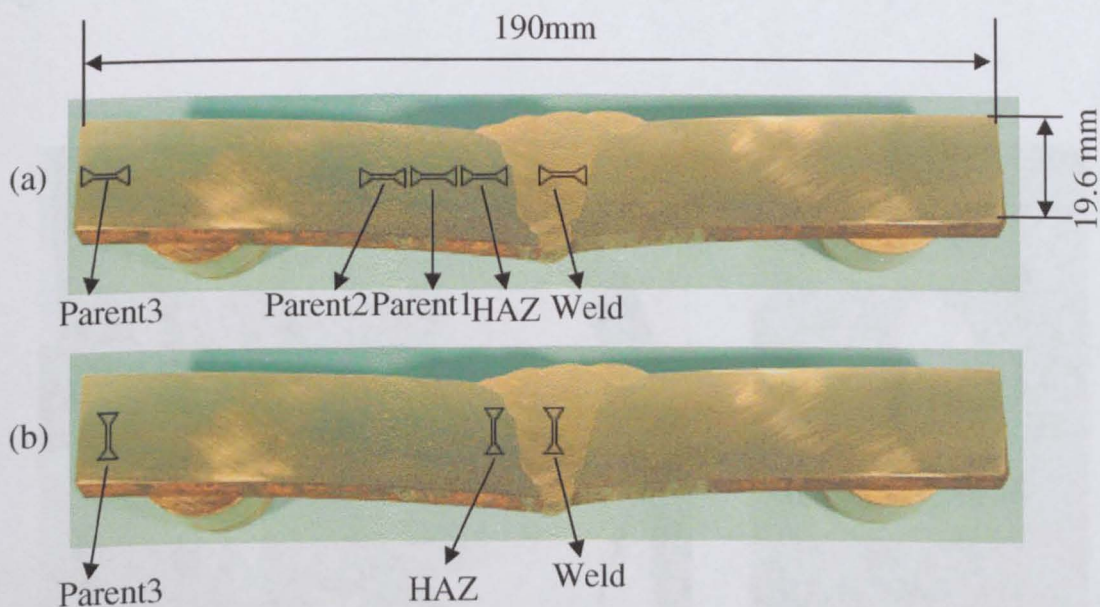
Machining positions on the slice taken from the pipe for micro-tensile specimens in (a) the longitudinal and (b) weld line directions.
